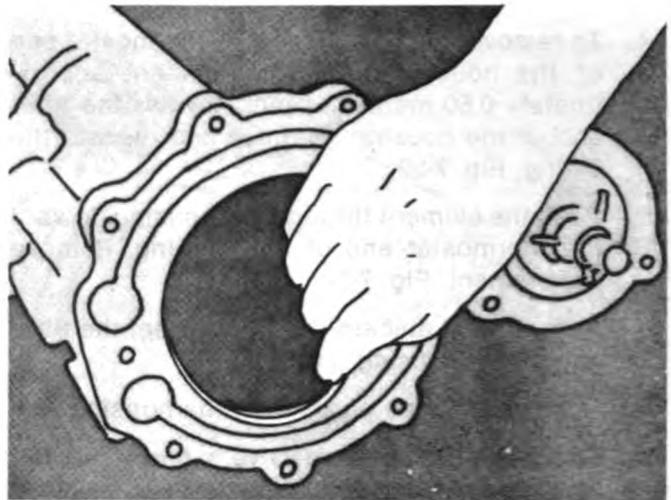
Install The O-Ring Into The Thermostat End Of The Housing.
